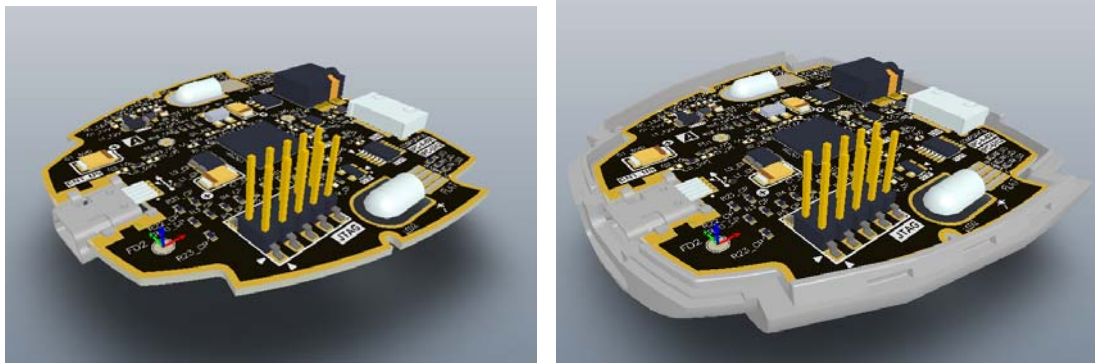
Board only in 3D view mode, then shown inside bottom half of enclosure.
